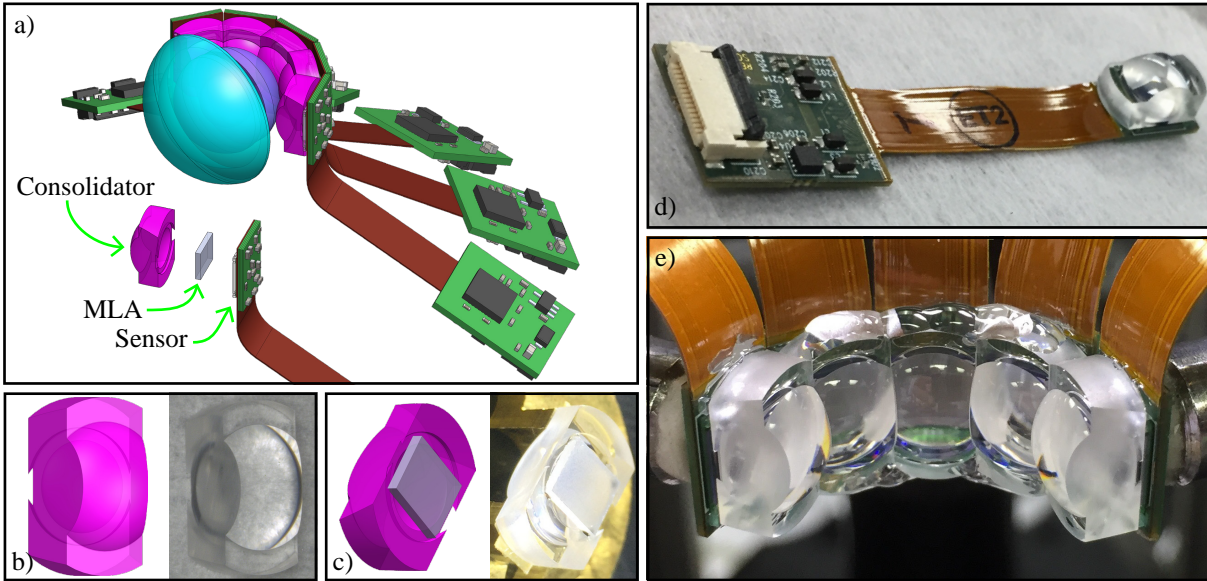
(a) CAD assembly of the five sensor array behind a monocentric lens with an exploded sensor stack to the lower left. (b) CAD and fabricated consolidator after wedge cut and with microlens array attached (c). Final assembled consolidating light field image sensor on flex (g) and after assembly into the full panoramic array (e).
